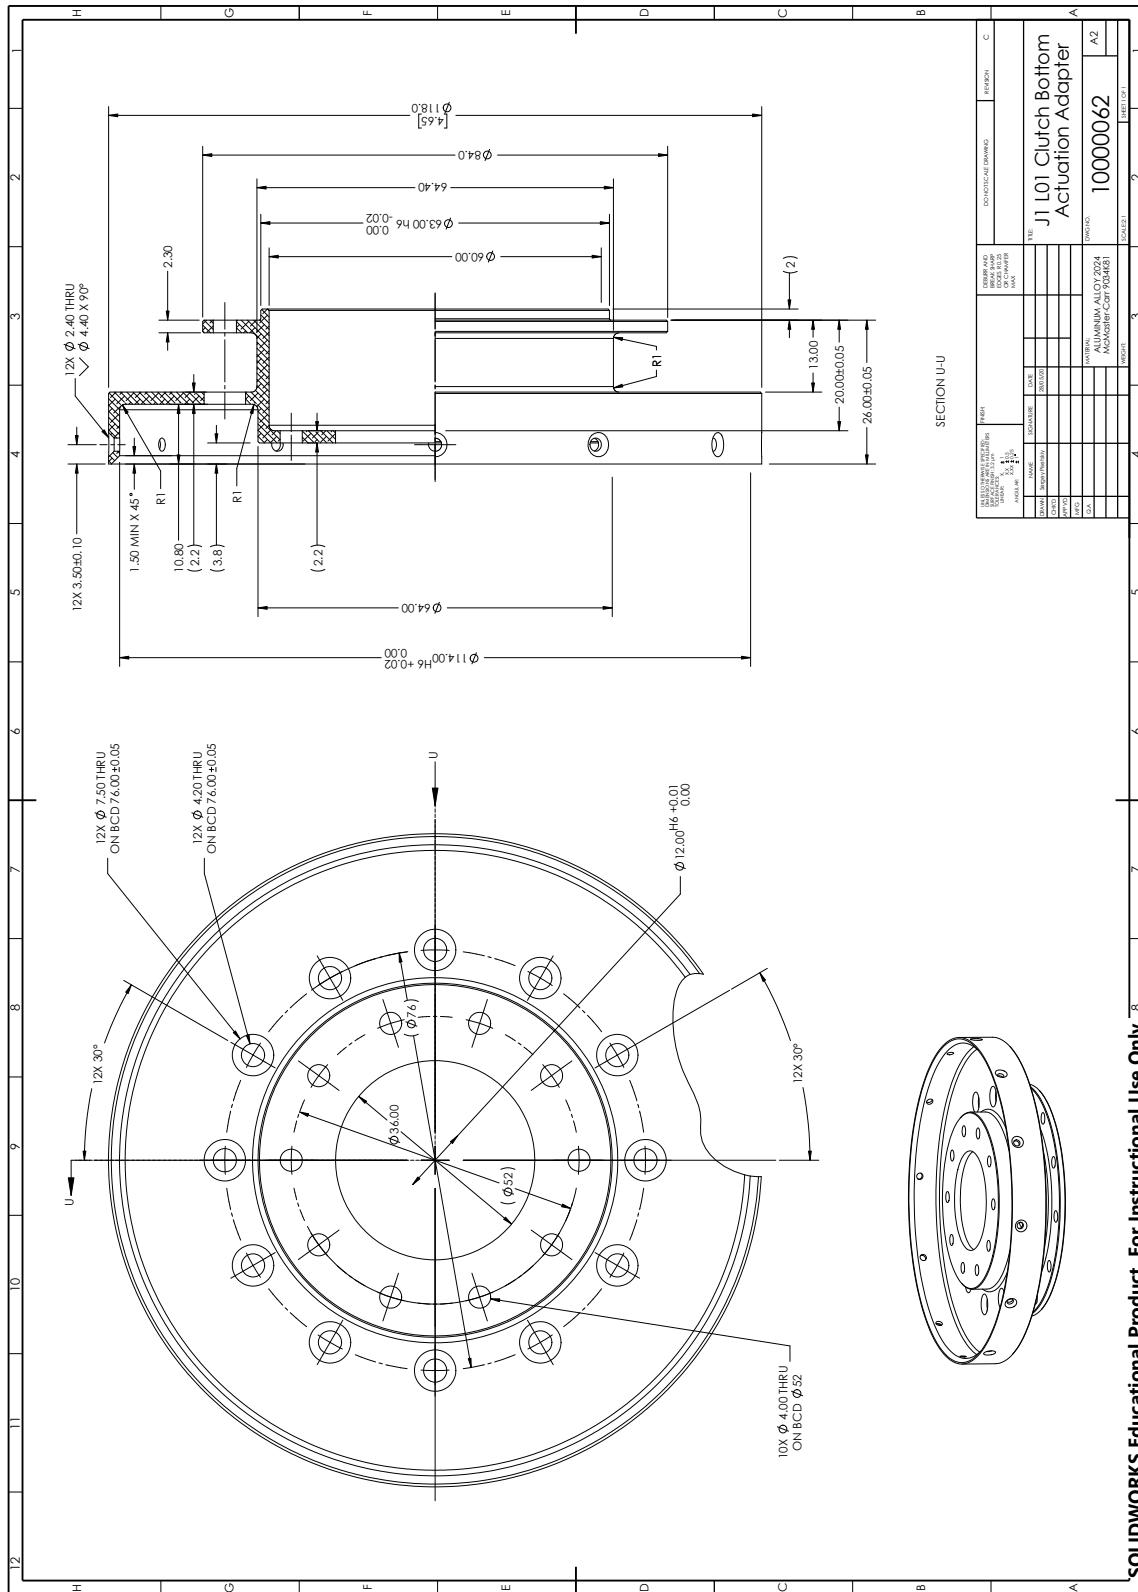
Drawing: Joint 1 bottom clutch actuation adapter.
